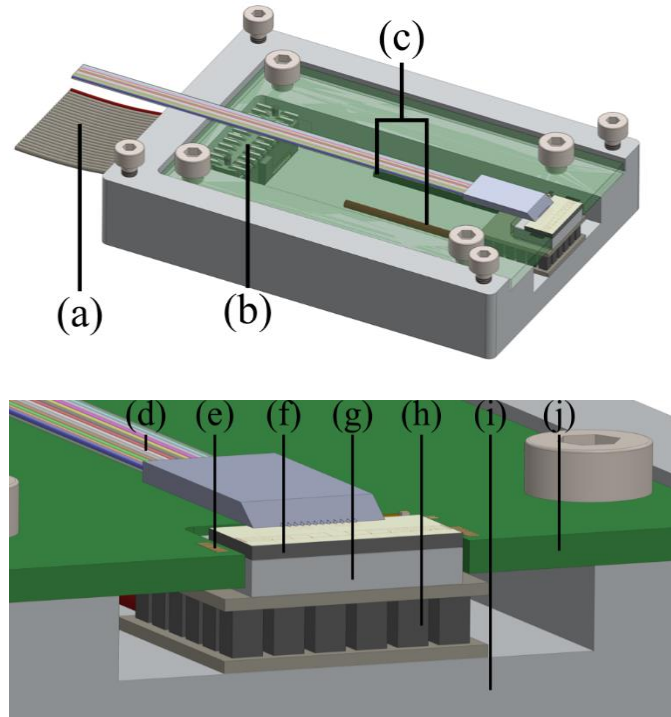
Photonics packaging top view (top) and side view (bottom) developed with our PIXAPP partners. (a) Ribbon cable, (b) Serial cable connector, (c) Thermoelectric cooler (TEC) wires, (d) Optical fiber array, (e) Bond-pads, (f) Beam steering chip, (g) Thermistor, (h) Thermoelectric cooler (TEC), (i) Packaging holder, (j) Printed circuit board (PCB).
